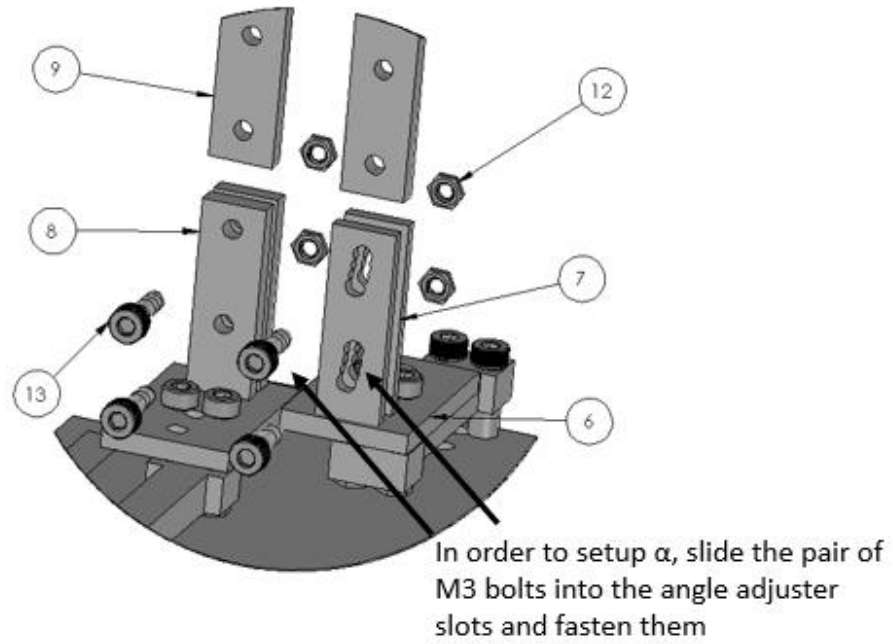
Detail view of the mechanism used for setting the wing samples' α (exploded view).
